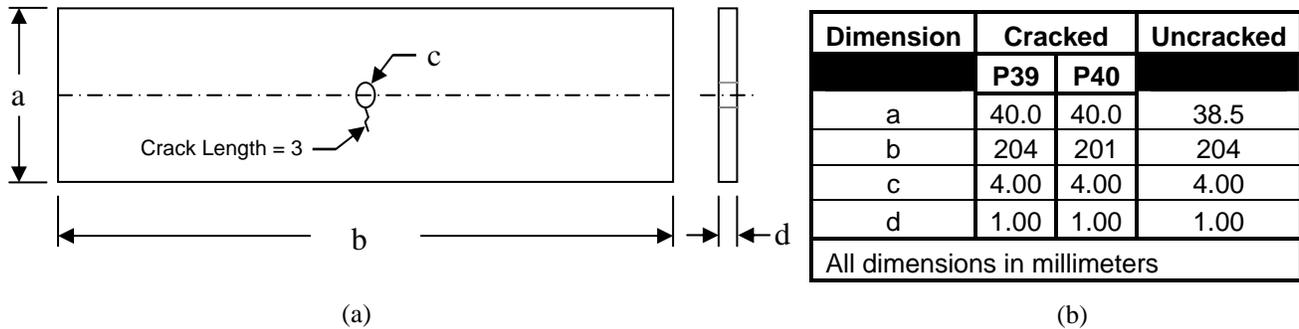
(a) Geometry of three aluminum plate test specimens (not to scale) (b) Dimensions of cracked (P39 and P40) and uncracked plates
